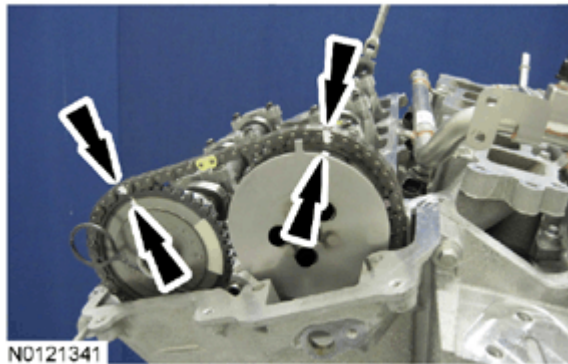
Positioning RH Camshaft Phaser And Sprocket Into Timing Chain With Alignment Marks
